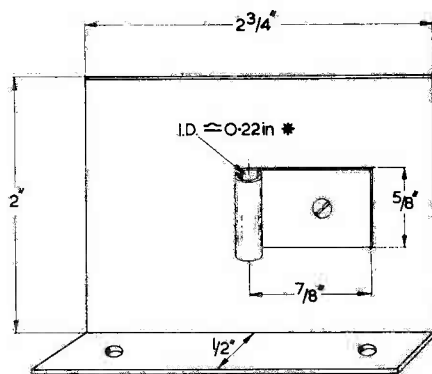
Dimensions of suitable heat sinks for the output transistors. 16 s.w.g. aluminium should be used for the actual sinks and thinner metal for the clips. See text.
